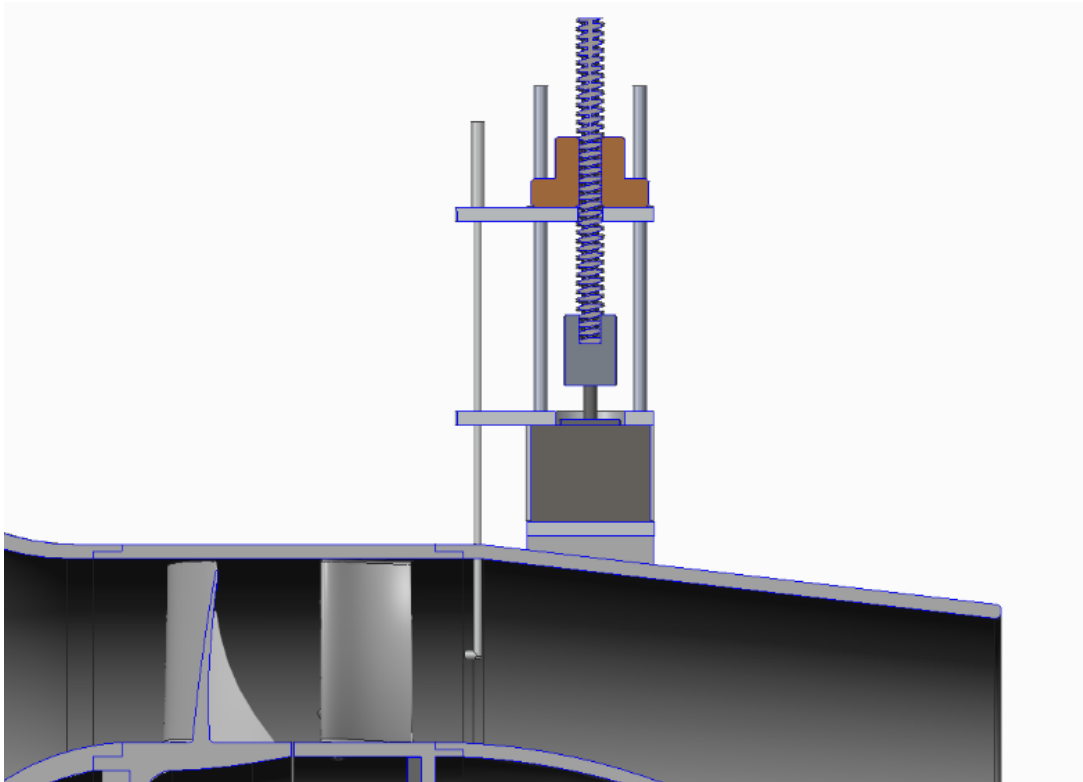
A cross-sectional view of the radial traverse mounted on the exit nozzle
